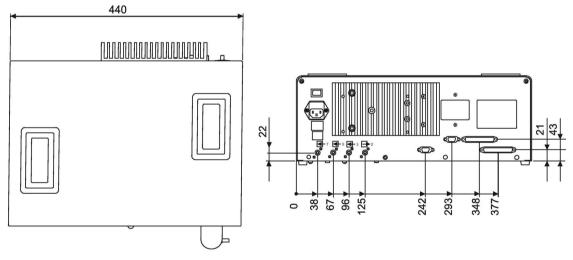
ULTRAMAT 23, dimensions of bench-top unit
